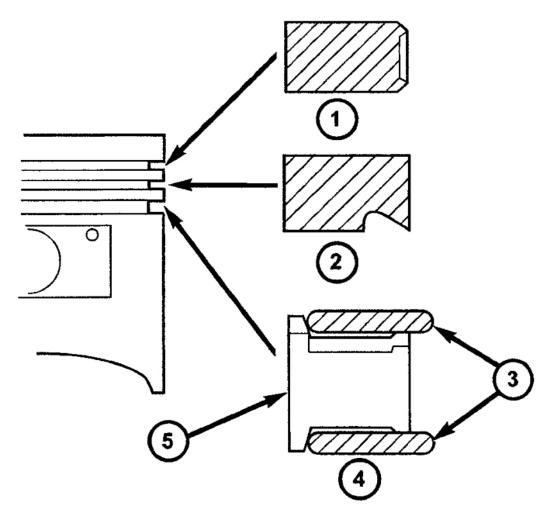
Removing Piston Rings Courtesy of DAIMLERCHRYSLER CORP.
